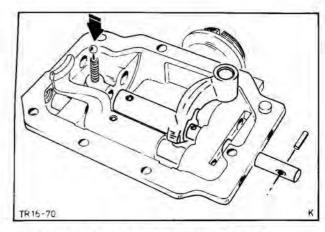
Fit 3rd/4th gear selector rail and fork carrier
